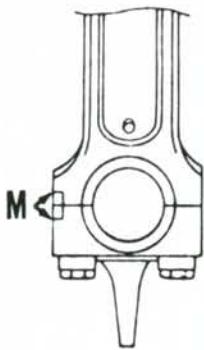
Match marks (M) on side of rod and cap must be aligned during assembly.
